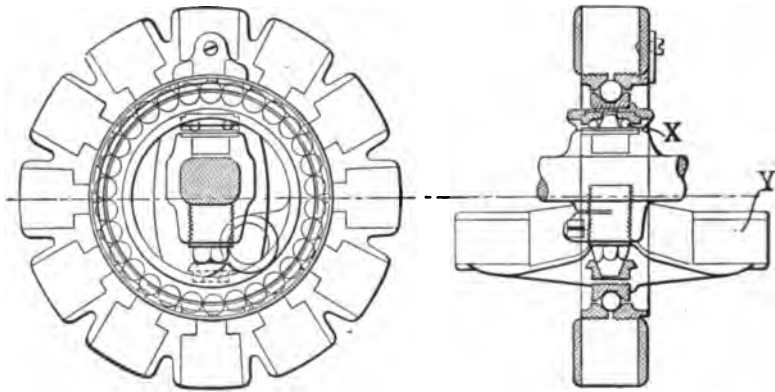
Steering Head of the Duryea Three-wheeled Carriages. X is the support of the wheel which turns on the ball race shown. Y is the attachment of the steering links.
